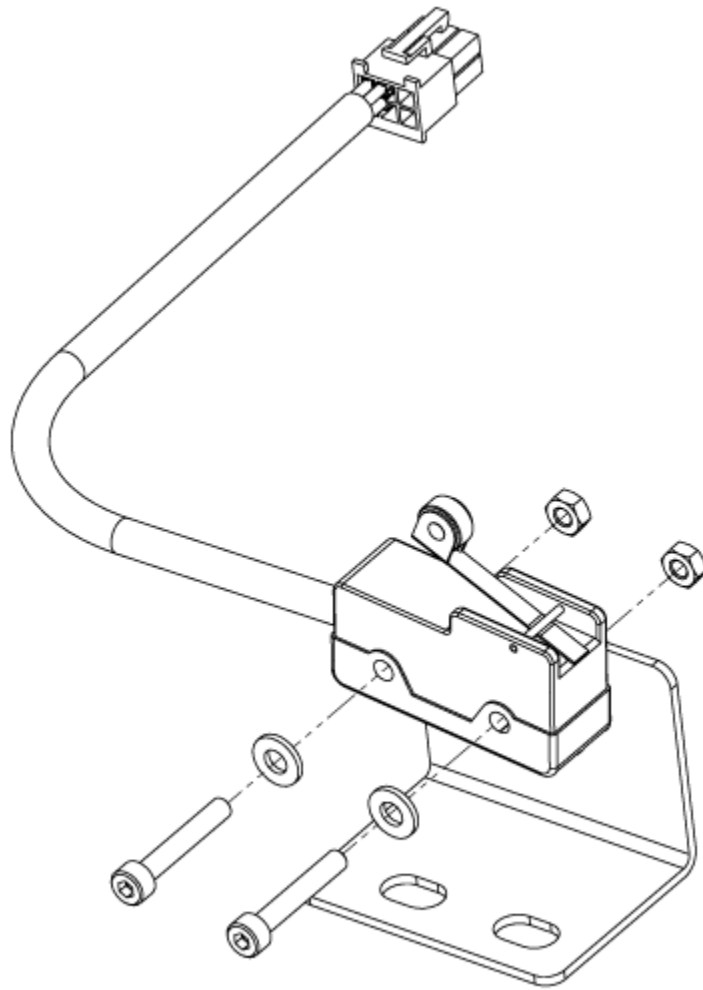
Press Arm Switch Assembly (P/N 47071)
